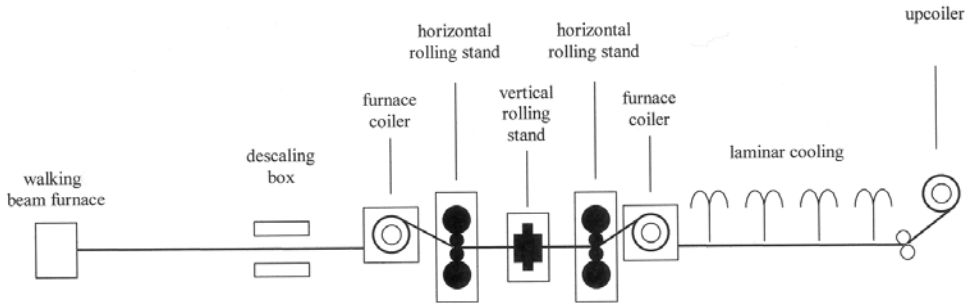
Layout of two-stand reversible Steckel rolling mill in ISPAT NOVA HUT
